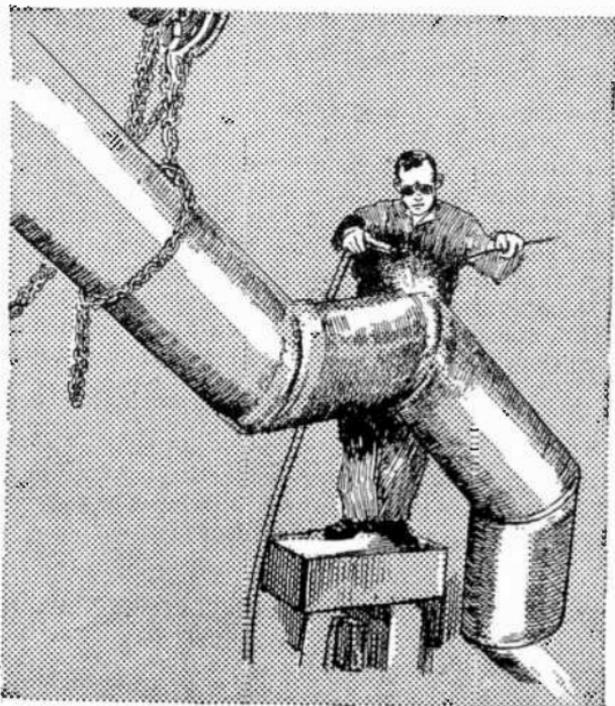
,165.—Welding an off set bend on a large pipe with fittings for the off set turn cut from pipe stock. This is a makeshift job at best. This method requires very careful laying out, gives abrupt turns and would be much more satisfactory if regular welded joint fittings be used.
